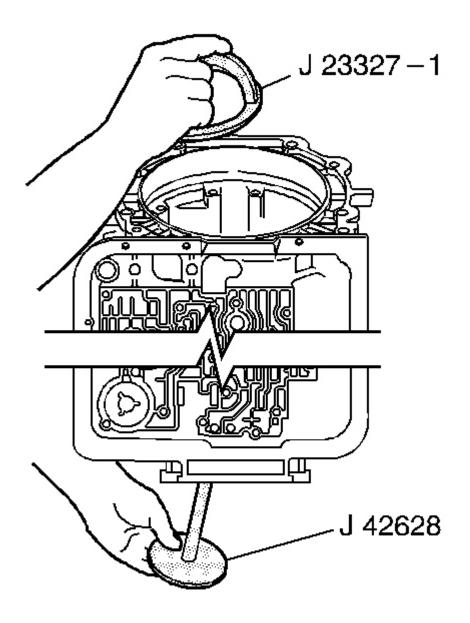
Identifying Special Tools J 23327-1 & J 42628
